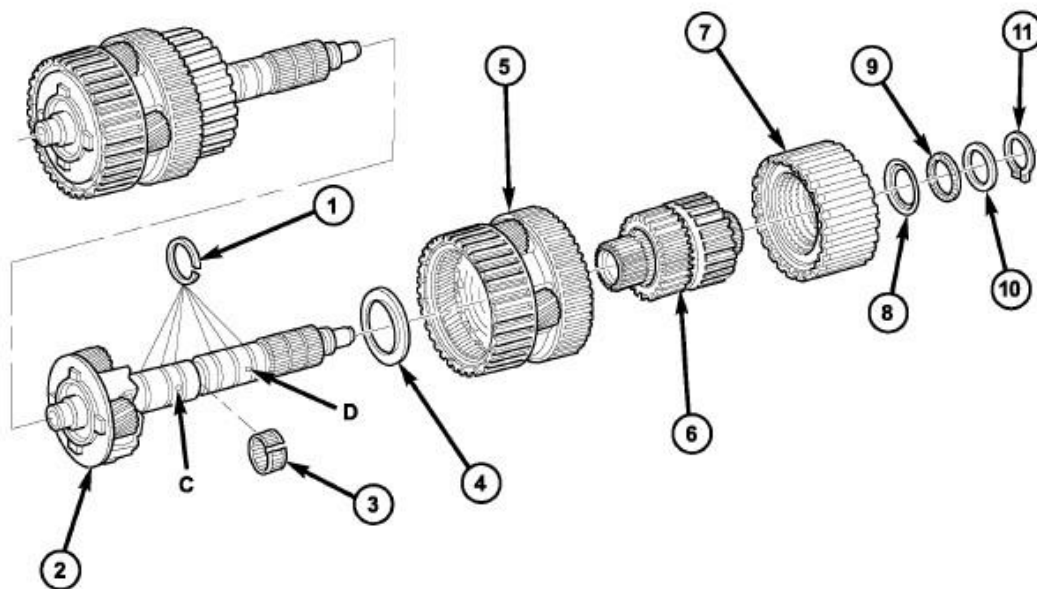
Output Shaft With Center & Rear Planetary Geartrain
